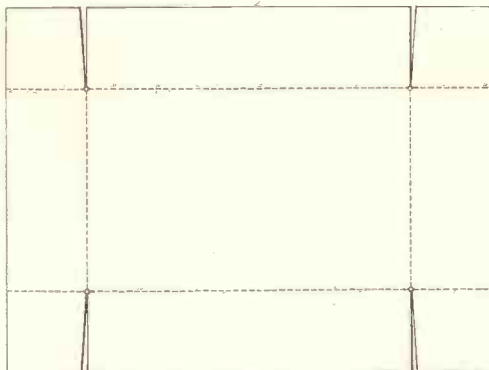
HOW THE TIN IS MARKED OUT BEFORE CUTTING.
